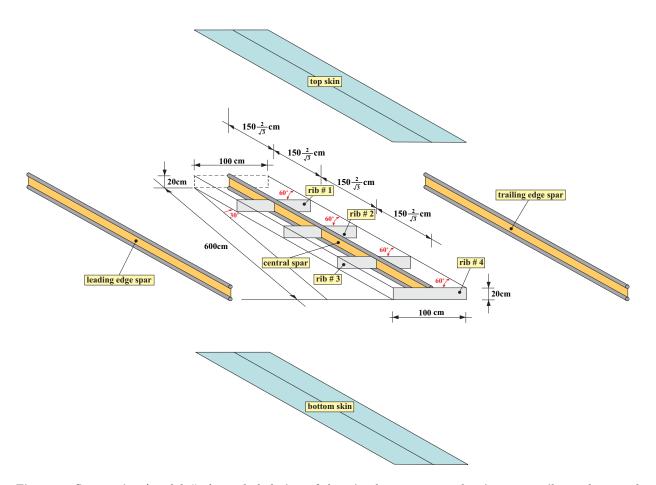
Swept wing (model # 2): exploded view of the wing box structure showing spars, ribs, and top and bottom cover panels.
